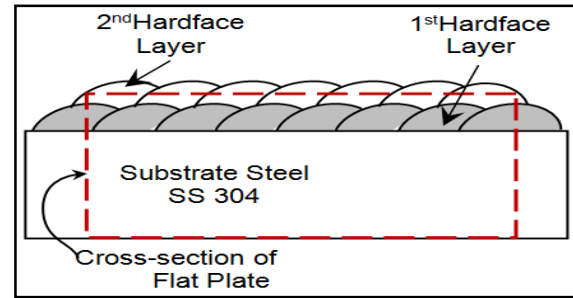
Two Layer Weld Overlay Development and Grinding of Top Surface
